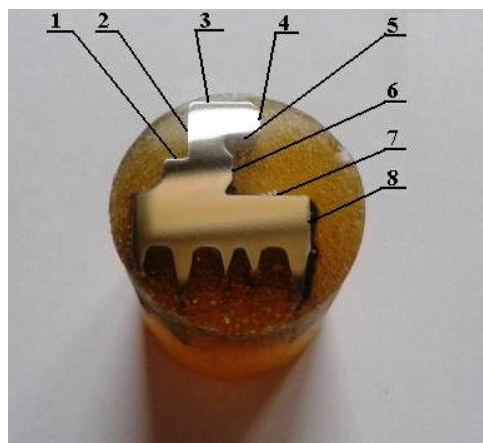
Pitting corrosion after 6700 hrs in 650 °C steam, turbine packing ETU23.
